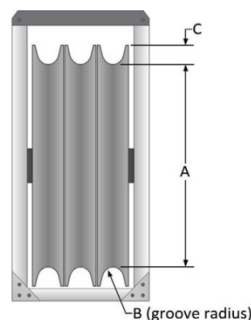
Stringing sheave dimensional measurements where: A = groove diameter, B = groove radius, C = groove depth.
